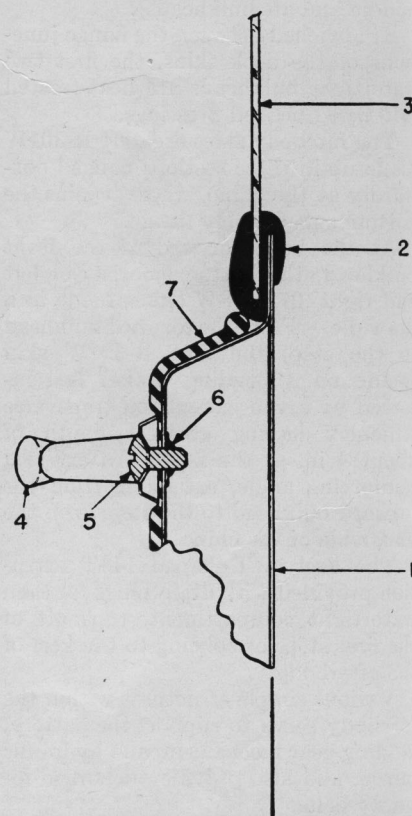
A part section through a side door: (1) door skin; (2) rubber S-extrusion window retainer; (3) window; (4) pull-to handle; (5) sheet-metal screw; (6) sheet-metal nut; (7) interior trim.
